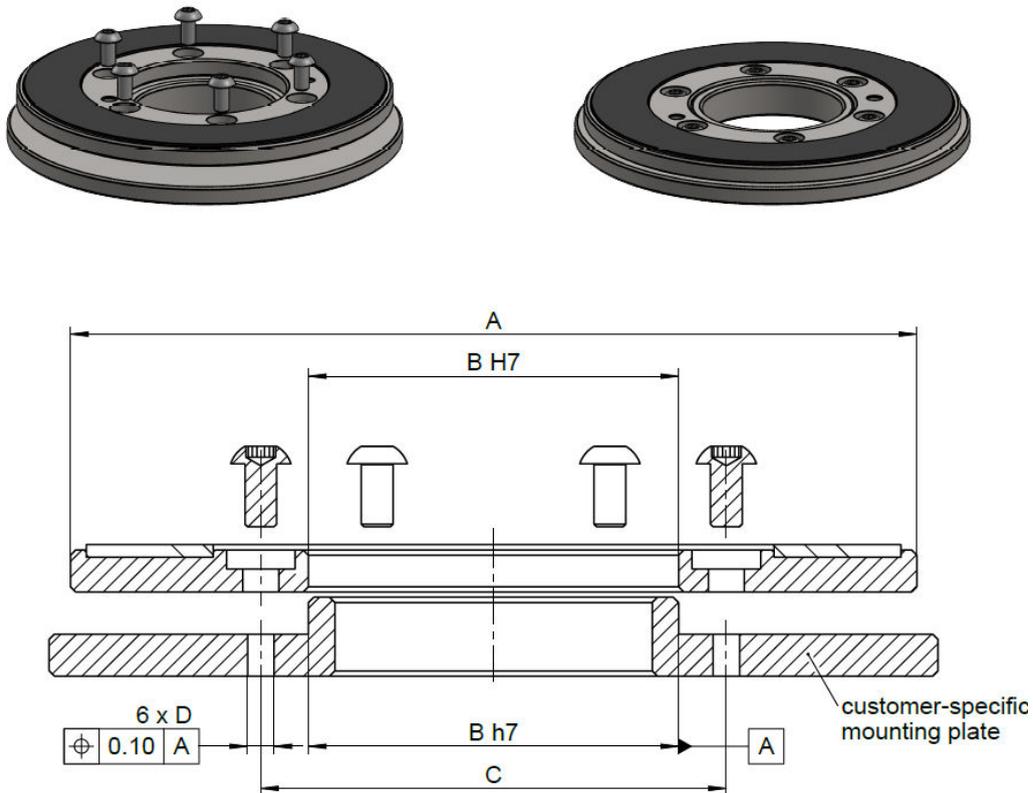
Rotor (GAR) mounting using ID sliding fit
